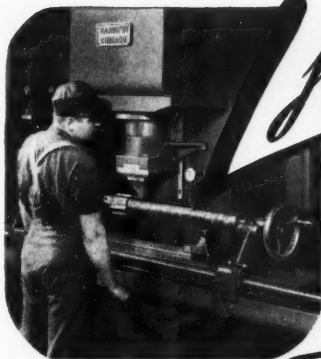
Model TMS-1 Crankshaft Turn Mill
